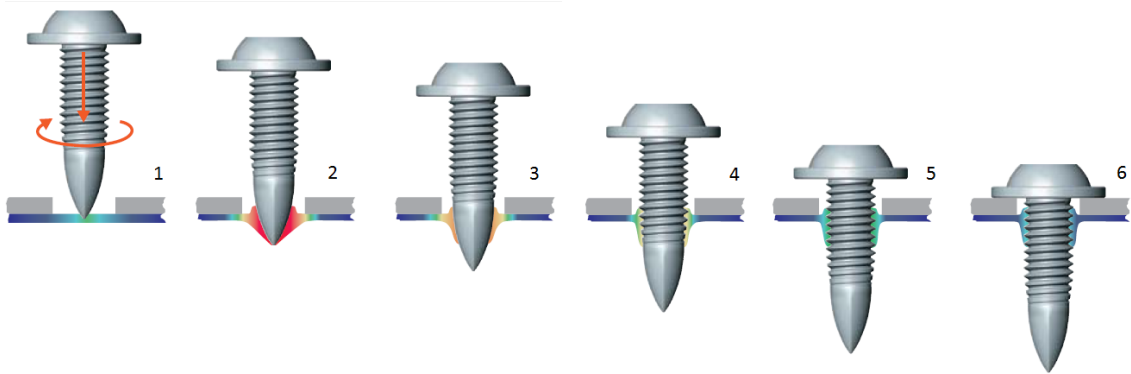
Assembly of Flow-Drilling Screws [33].
